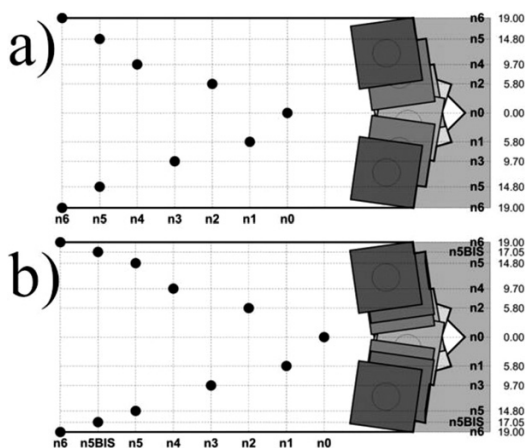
Schematic view of the cutting system with a) 7 (n0...n6) and b) 8 (n0...n6+n5BIS) cutting inserts with their positions on the cutting chain. The n0...n6 numbers coincide and denote the position of the cutting edge of cutting inserts (y-axis) and positions of the cutting insert carriers (x-axis). X-axis has the numbers of cutting inserts carriers, while the y-axis has the distance of the edge of the cutting insert from the central axis (0.00) of the cutting blade
